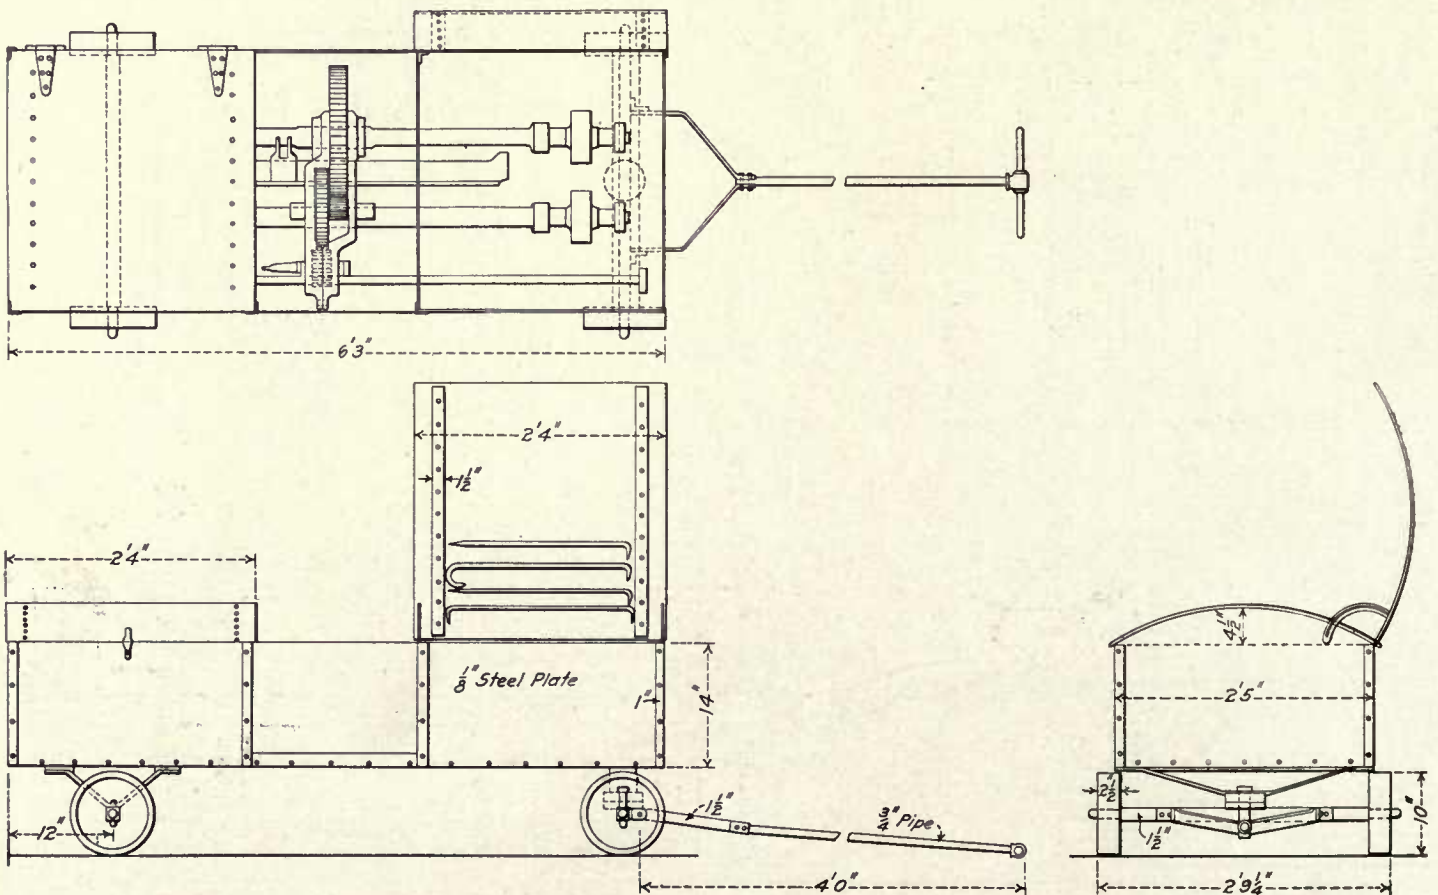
Portable Steel Box for Valve Setting Machine and Tools.
